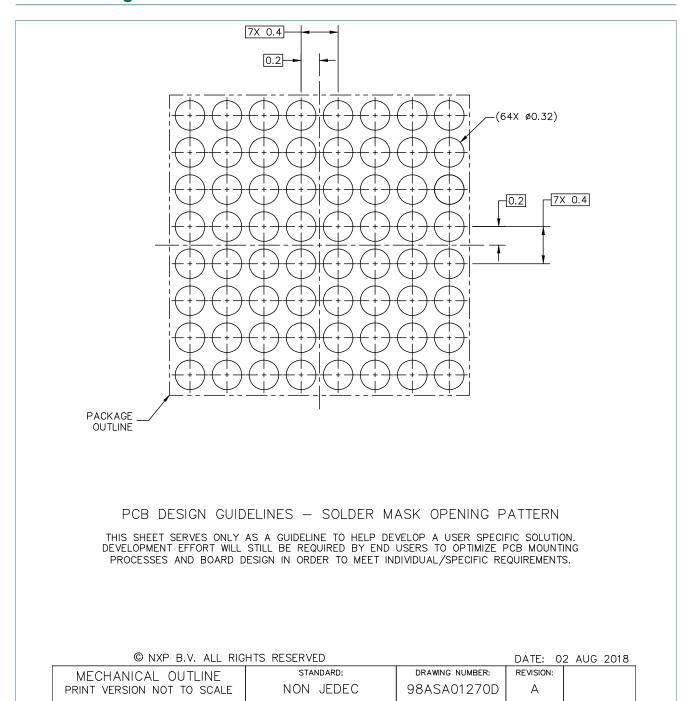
Reflow soldering footprint part1 for WLCSP64 (SOT1782-3)
